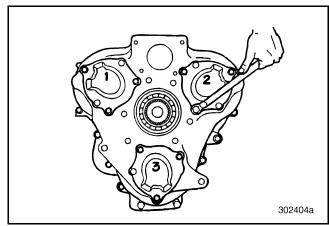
Removing Rear Countershaft Bearing Cover Capscrews
